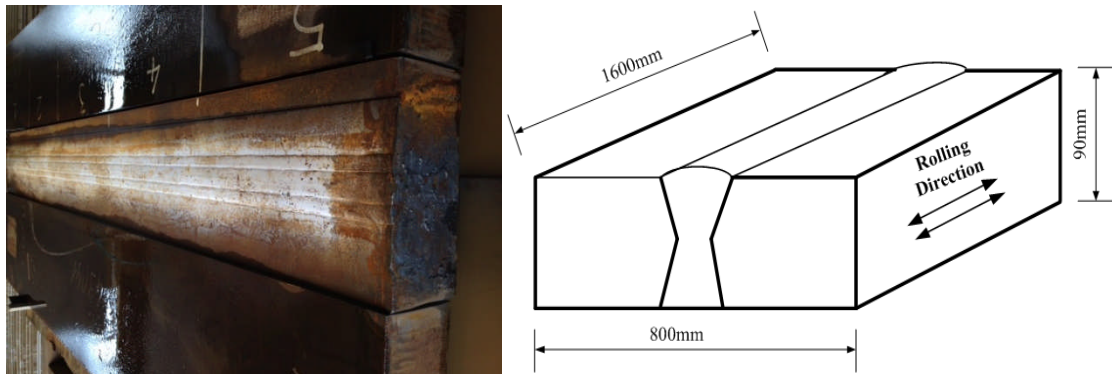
(a) 90mm thick weld plate (b) weld plate dimensions
